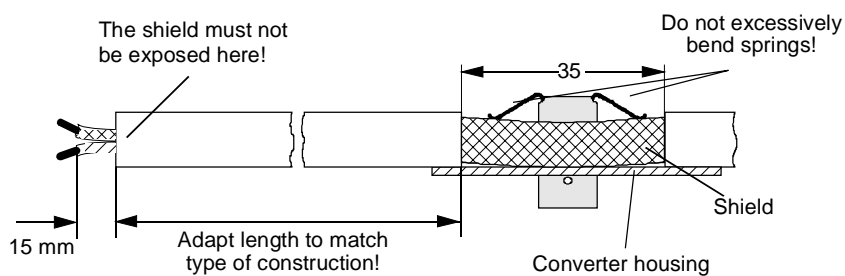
Removing insulation from the cable when shield clamps are used
